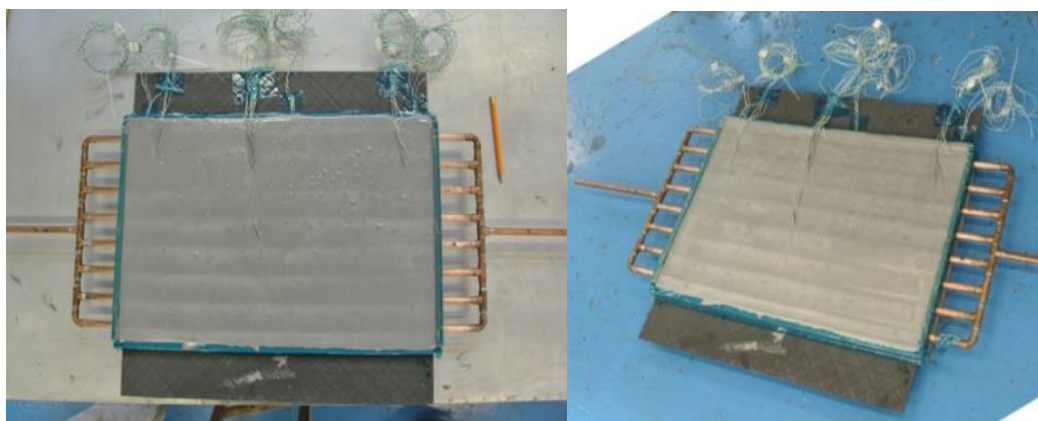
Combining the tool parts in the fixture with placing the thermocouples
